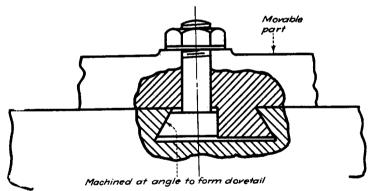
When a nut is tightened, the flange on the edge of the movable part is drawn against the machined edge of the stationary part. This method is effective, but the removal of the clamped part can be difficult if it is heavy or unbalanced.
